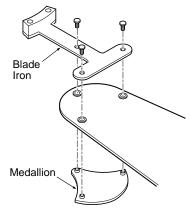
Attaching Fan Blade to Blade Iron using Decorative Medallion
